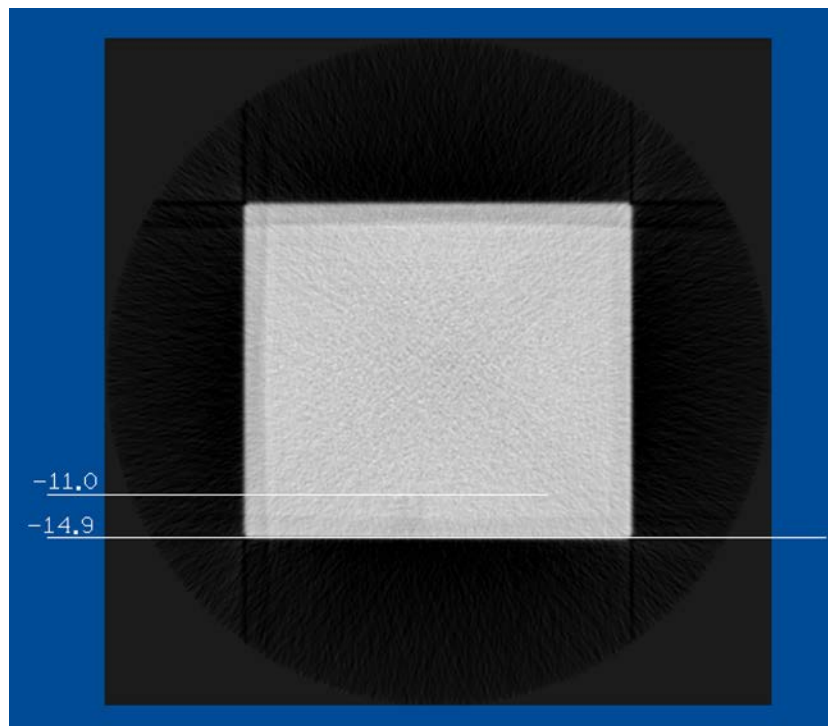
CT-slice #17 ($z=108.72$ mm) of test block P31 (MN 220 AD U 1), crack depth: 3.9 mm (+/- 2 pixel = 0.24 mm), 12.9% of weld thickness
